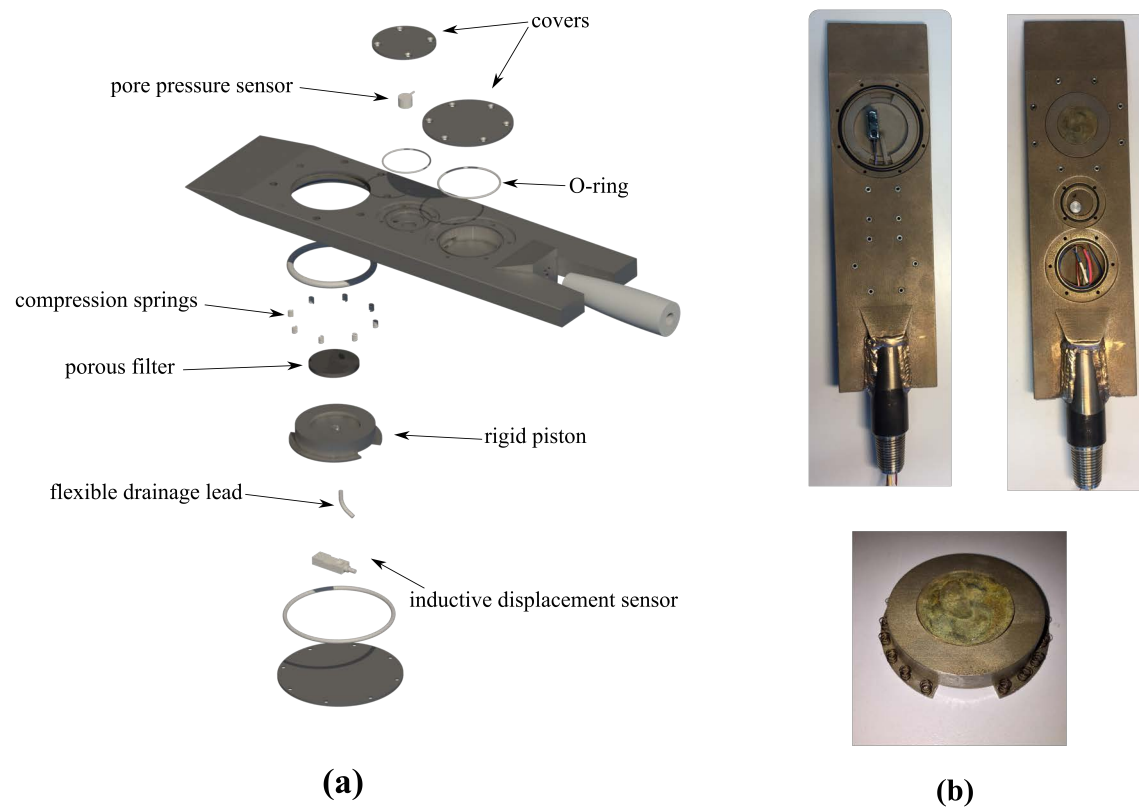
(a) Exploded CAD view of the instrumented dilatometer, (b) unveiled instrumented dilatometer (not to scale)
